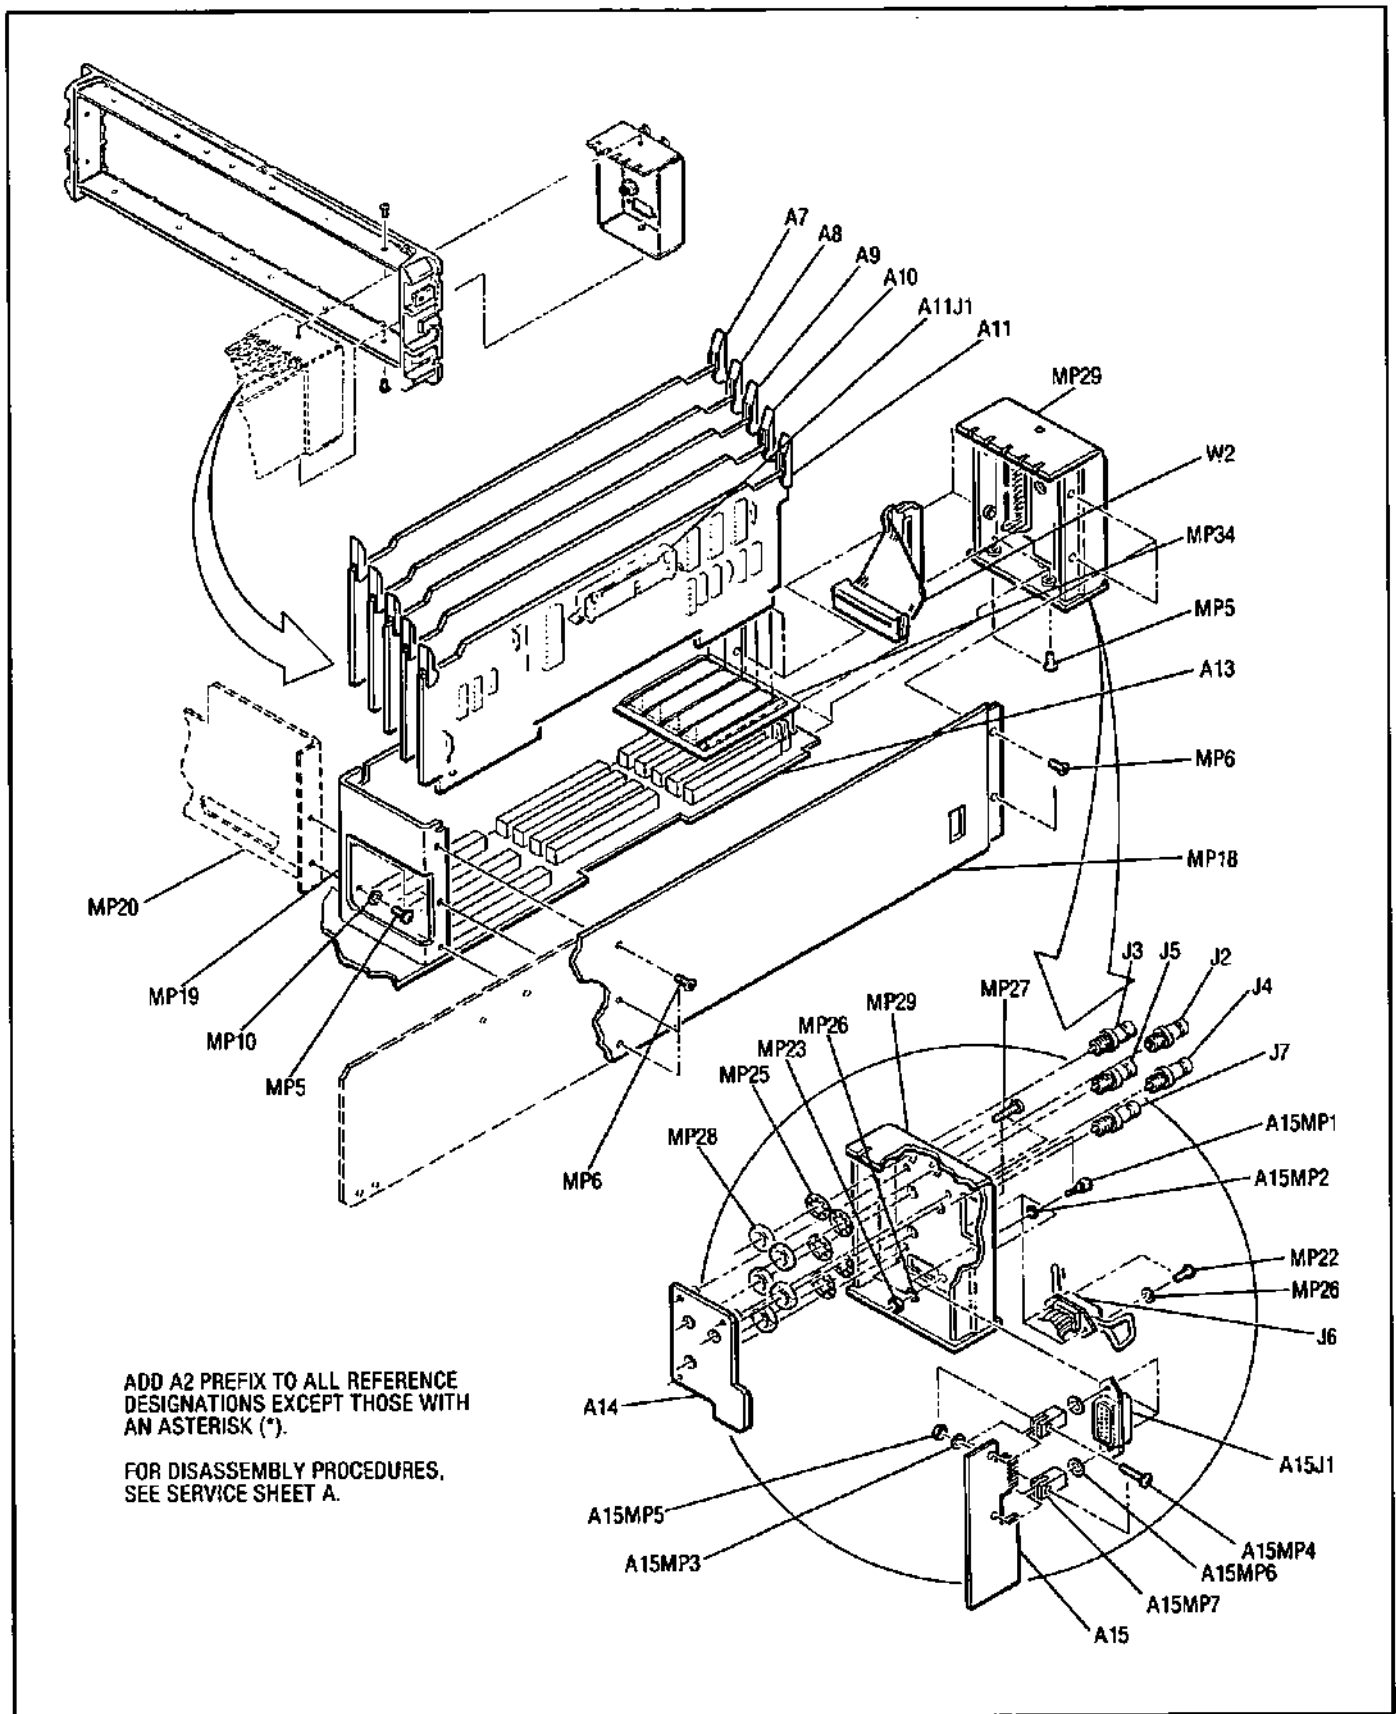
P/O A2 Controller Assembly and Rear Panel Illustrated Parts Breakdown
